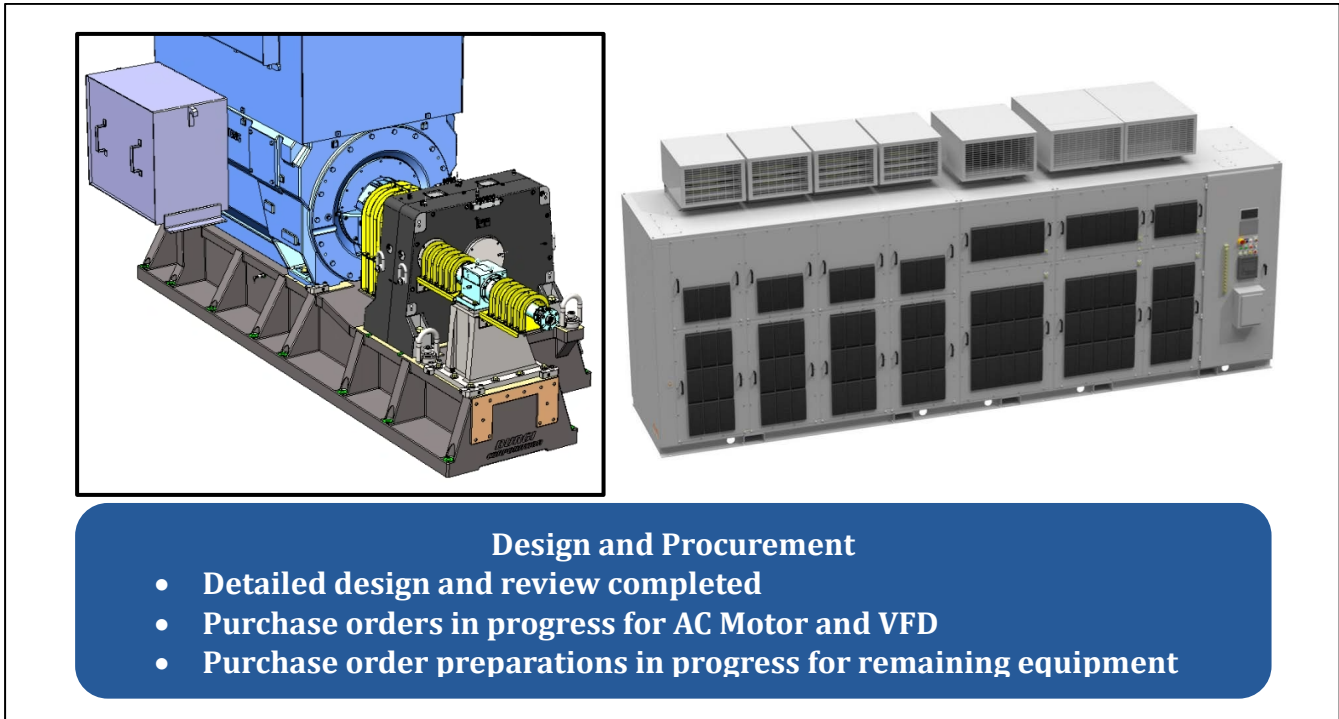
Drawing of the alternating current (AC) motor generator, gearbox, shaft drivelines, and variable frequency drive (VFD).
